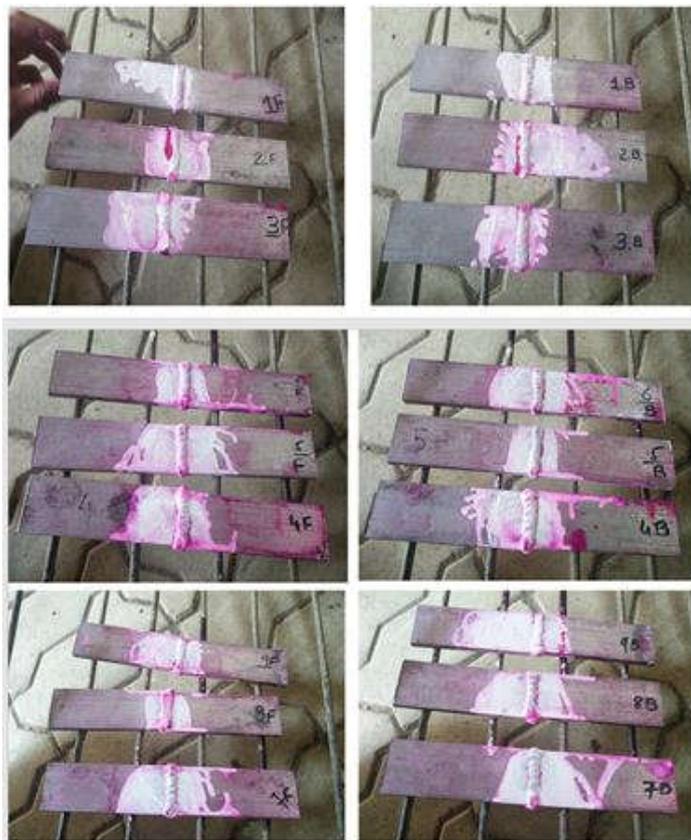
Dye penetrate test done on prepared weldments of AA 6061
